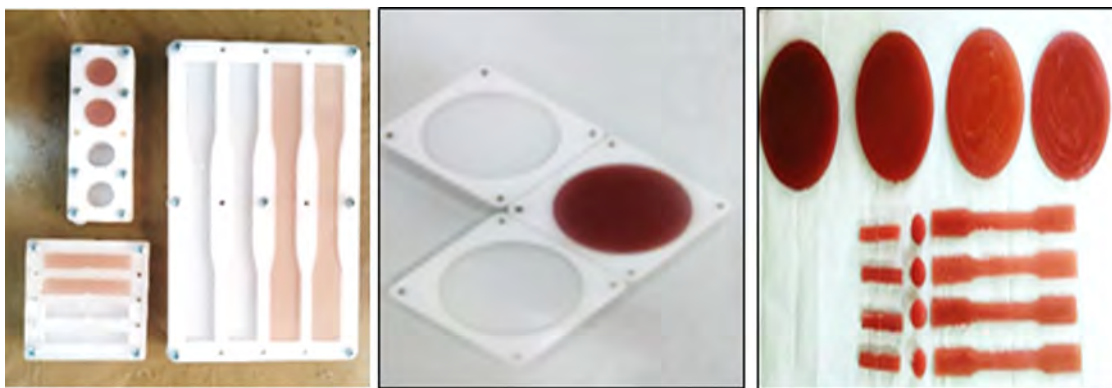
Casting Molds and Resulting Samples for Mechanical Properties Tests
